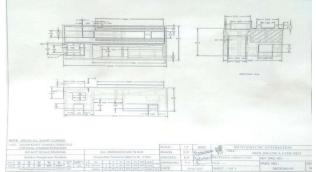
Detail Drawing of MGX200 CNC Lathe Bed
